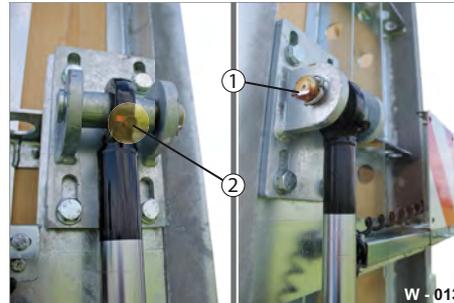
Upper ramp bearing point, hydraulic cylinder
